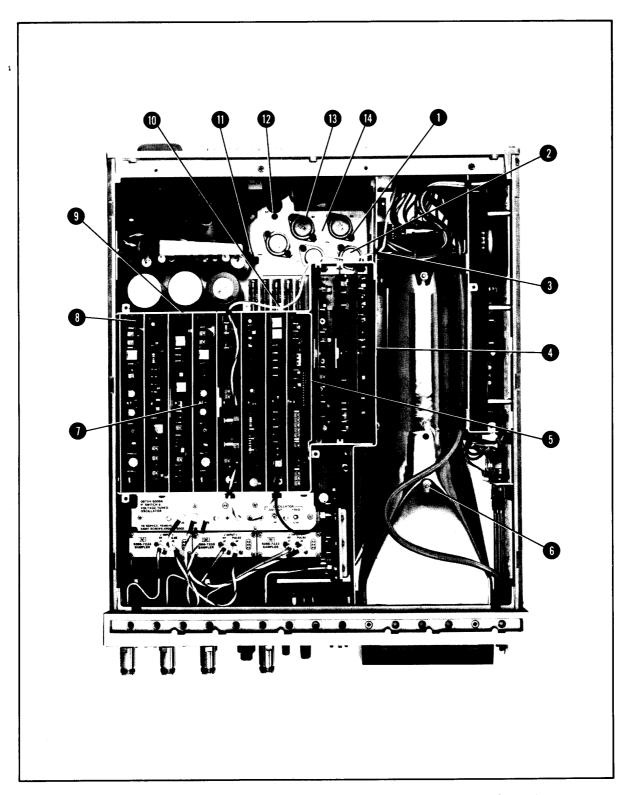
Illustrated Parts Breakdown, Bottom View With Cover Off (1 of 2)
